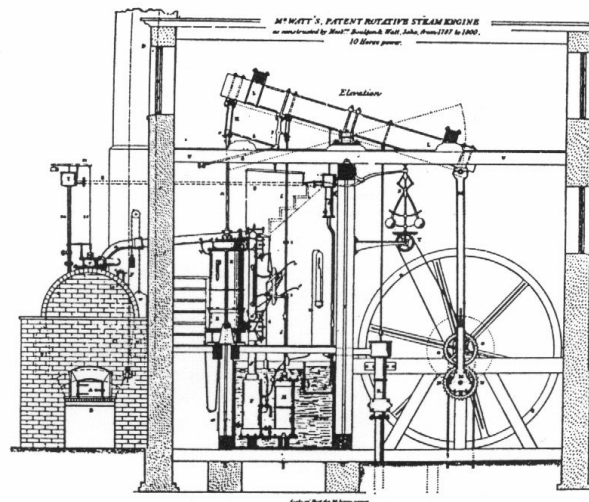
Drawing of James Watt's steam engine.¹⁶
